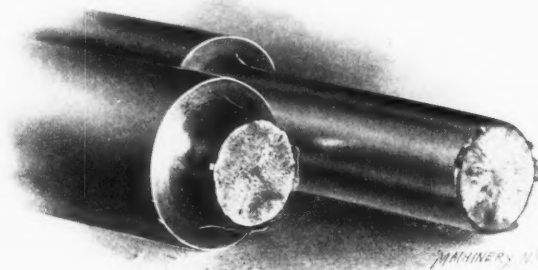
Test Bar, 1-2 inch Diameter. Heat Treated for Mesh-gears. Star Fracture.
